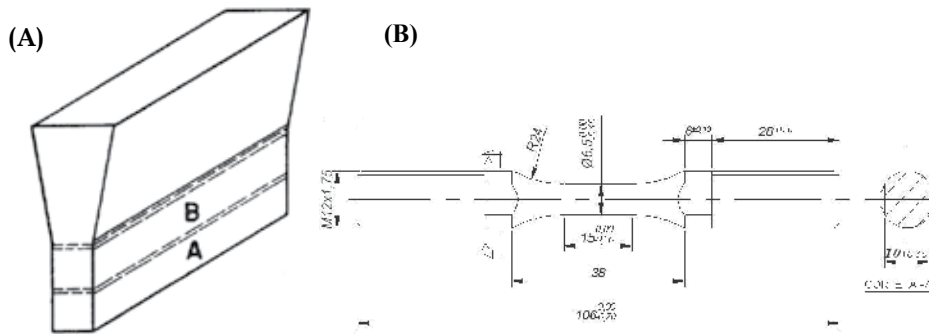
(A) Y-shaped block according to the ASTM A476/476M standard, showing regions A and B from which the specimens were removed, and (B) geometry and dimensions of specimen used in the TMF and IF tests, dimensions in mm.
